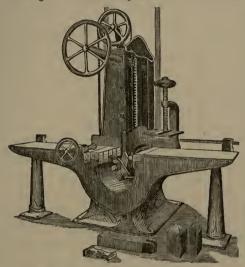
FAY'S GAP-BED TENONING-MACHINE.
